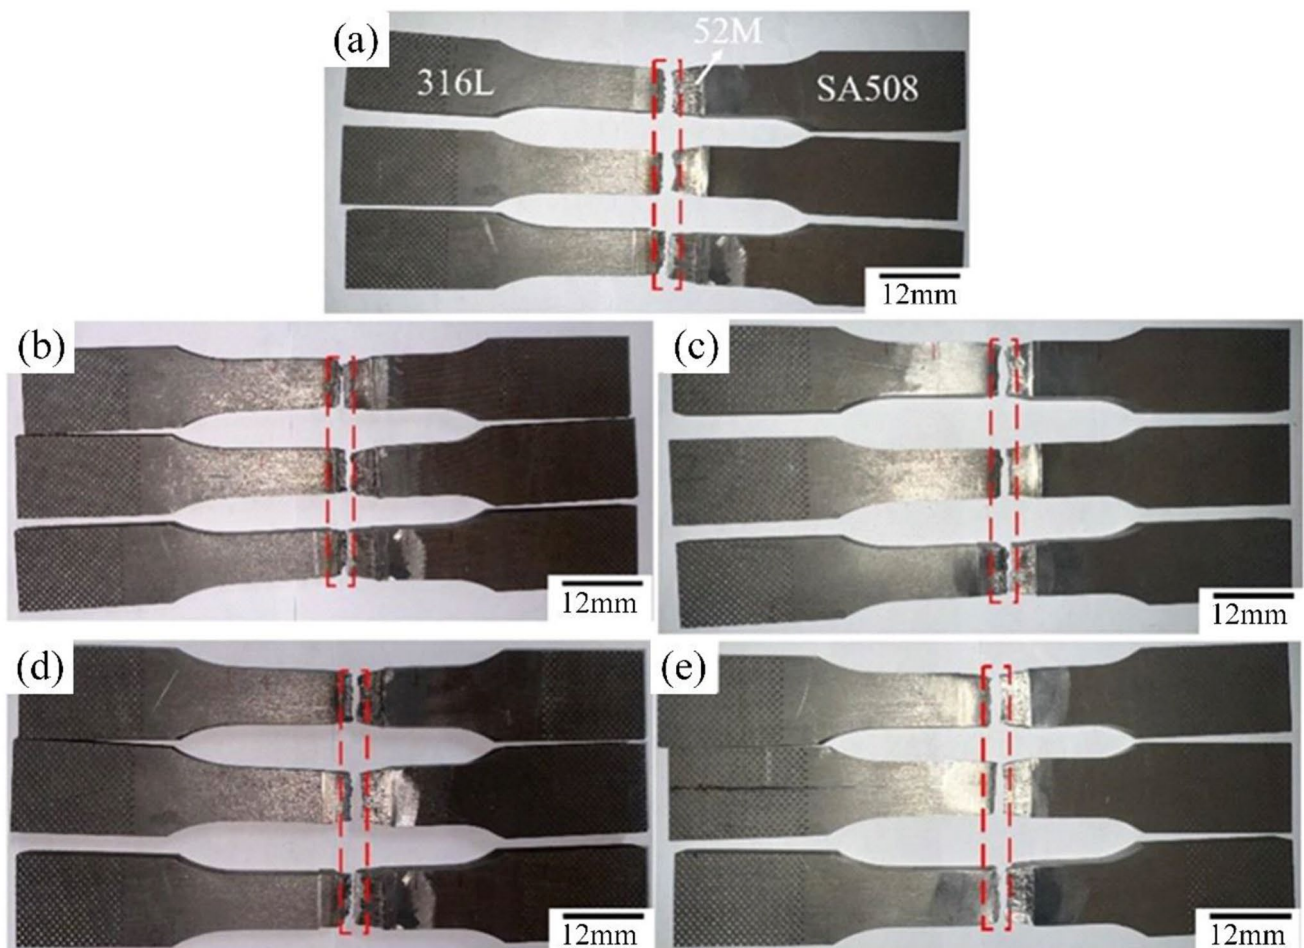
Fracture location of the tensile specimens of the welded joint with different 52 M/308L wires ratio: (a) 75%:25%, (b) 60%:40%, (c) 50%:50%, (d) 40%:60% and (e) 25%:75%
